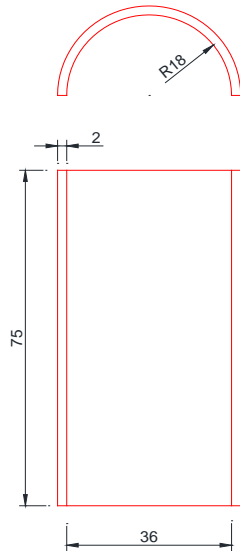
Dimensions (mm) of the semicircle shaped wind turbine blade
